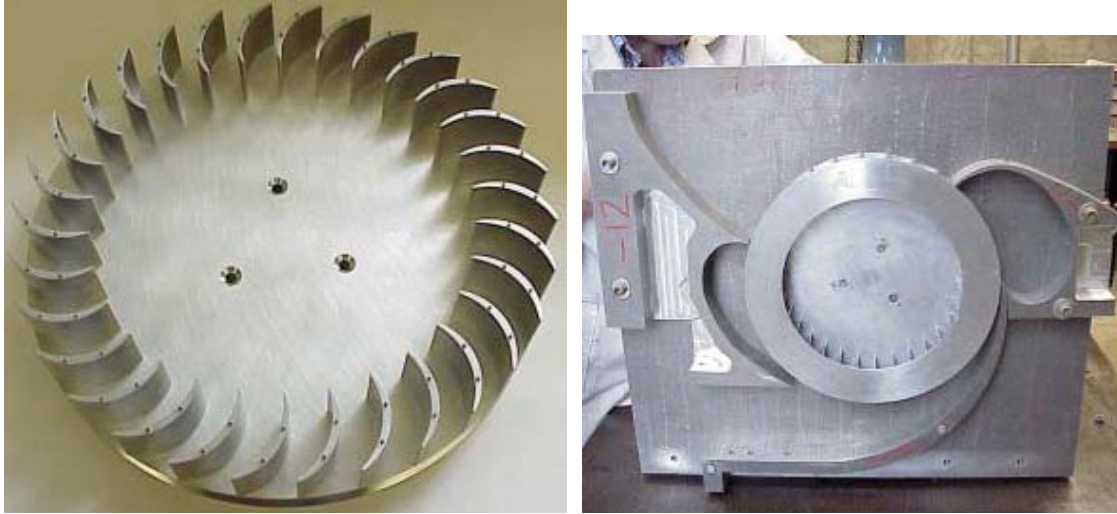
CFF assembly (a), Partially assembled 30 bladed rotor and (b), Partially assembled rotor housing. From [7]
